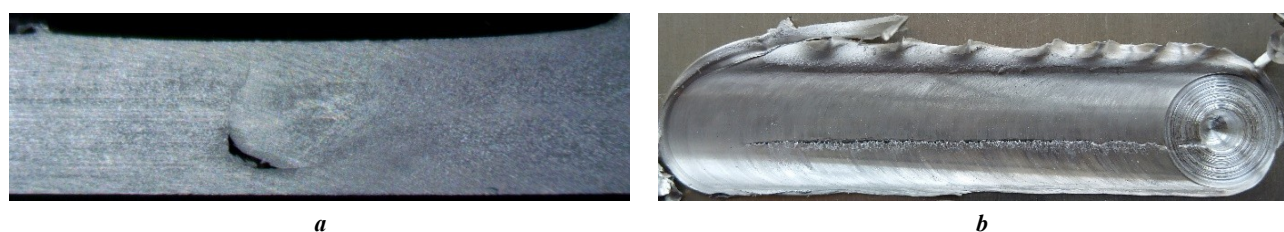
Appearance (a) and macrosection (b) of the cross section of the welded joint produced by a tool with a conical pin shape with a thread and a spiral groove on the end surface of the tool shoulder (Fig. 1 c).
